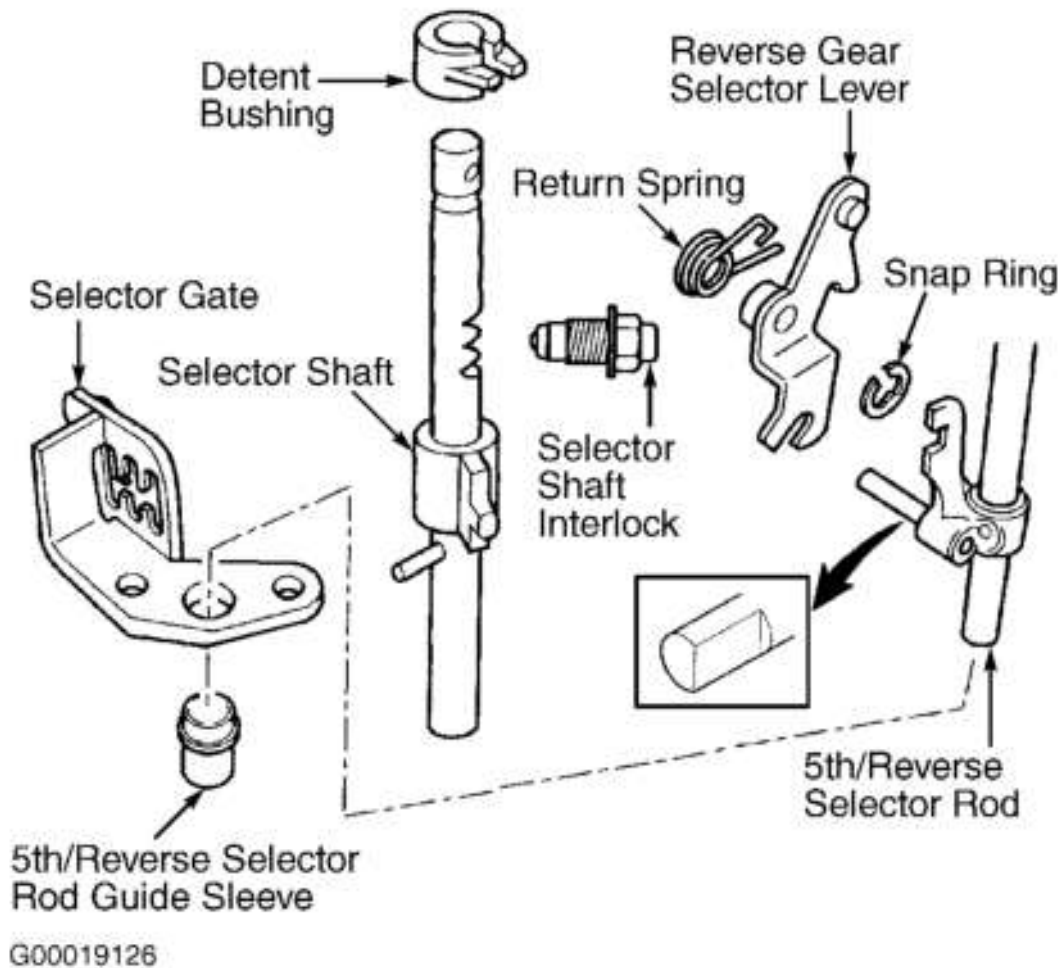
Exploded View Of 5th-Reverse Selector Mechanism
